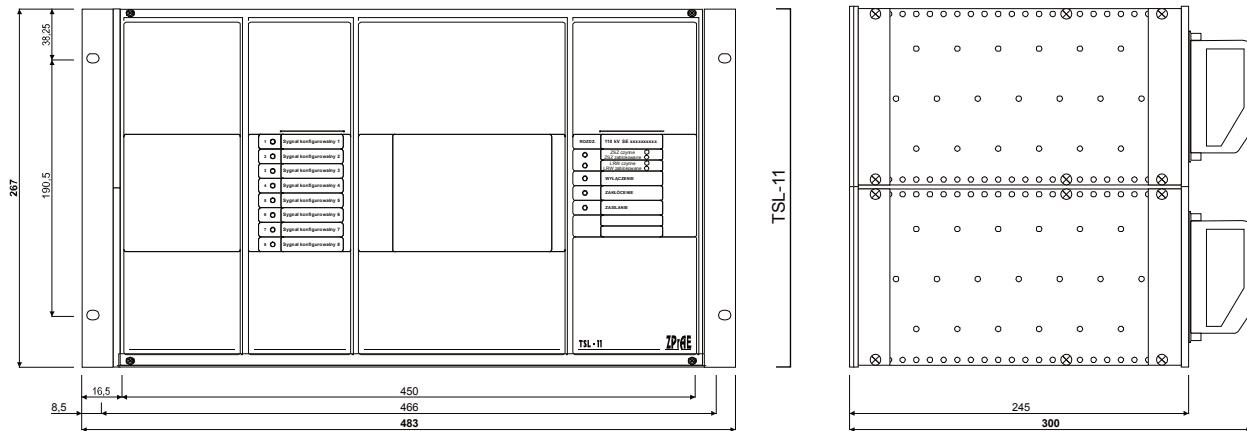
External dimensions of a TSL-11, EURO-19"/6U unit (standard version).
